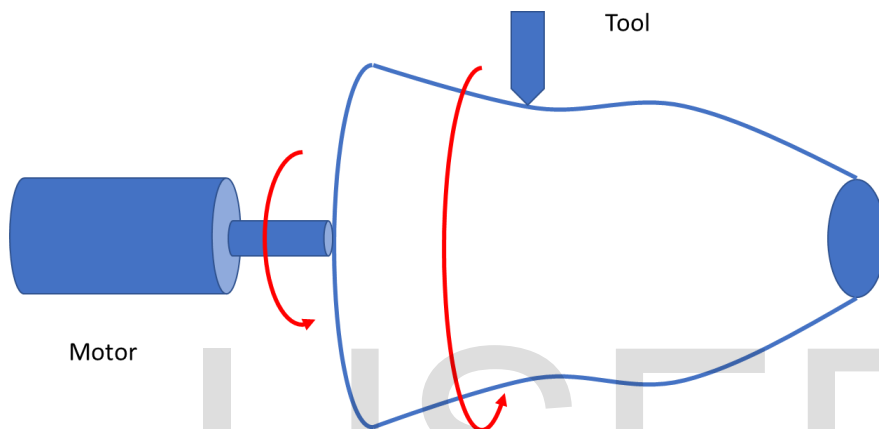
Axisymmetric part fabricated by rotating a substrate and engagement of tool
